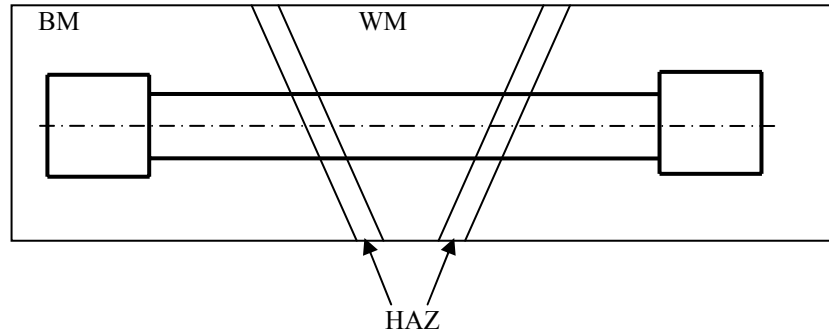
Sampling of specimen for test of circumferencial weld (State C).
